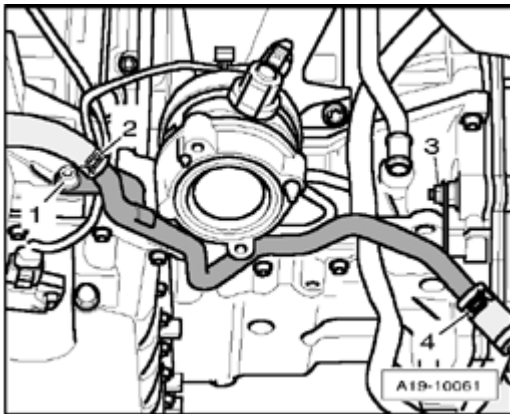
Lower Left Coolant Pipe Coolant Hoses, Bolt & Nut
